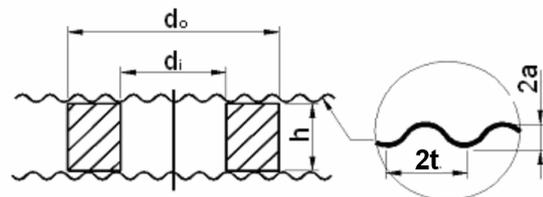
Geometric model of the tool surface using an elliptical or sinusoidal profile
